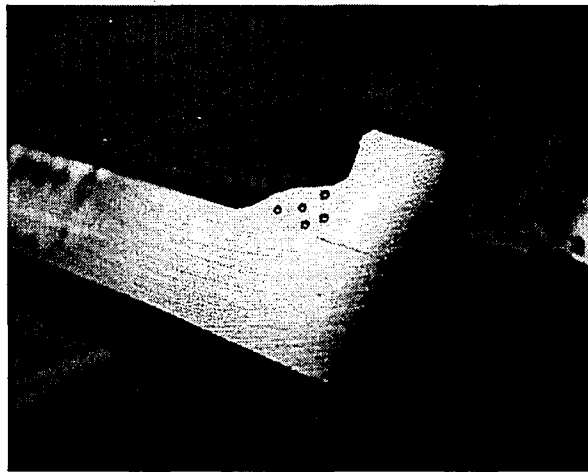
Rockwell B Hardness Indentations on Test Specimen Weld Cross-Section
